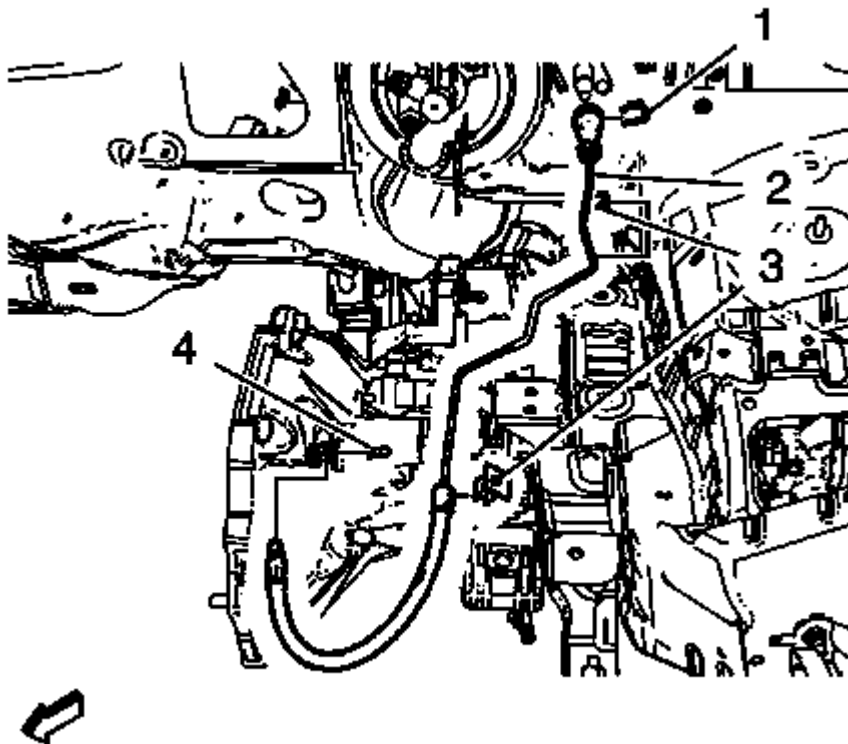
Clutch Actuator Cylinder Front Pipe Retainers
